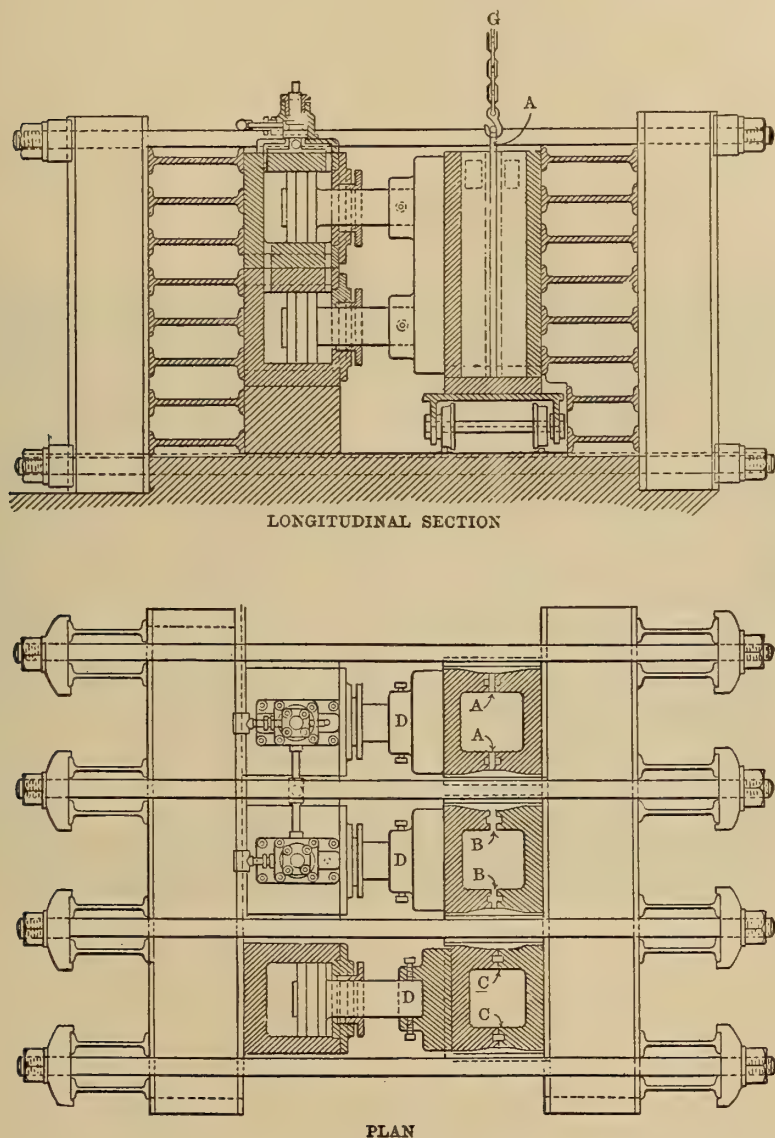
ILLINGWORTH CASTING MACHINE FOR LARGE INGOTS IN MOULDS ON WHEELS
